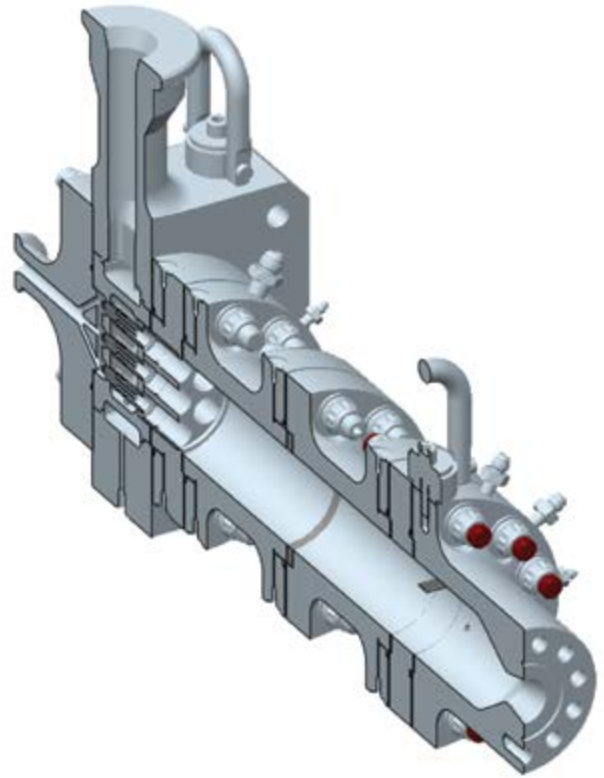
Depiction of material sample installed in MSFC's preburner assembly.
